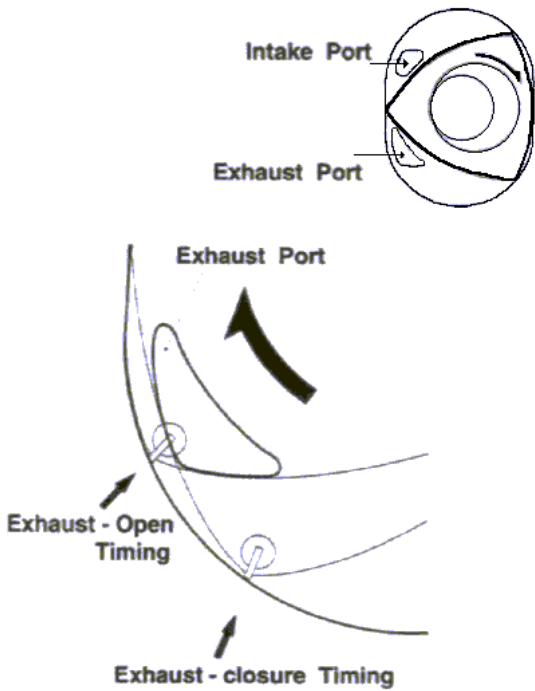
Detailed Drawing of the Exhaust Port Shape
